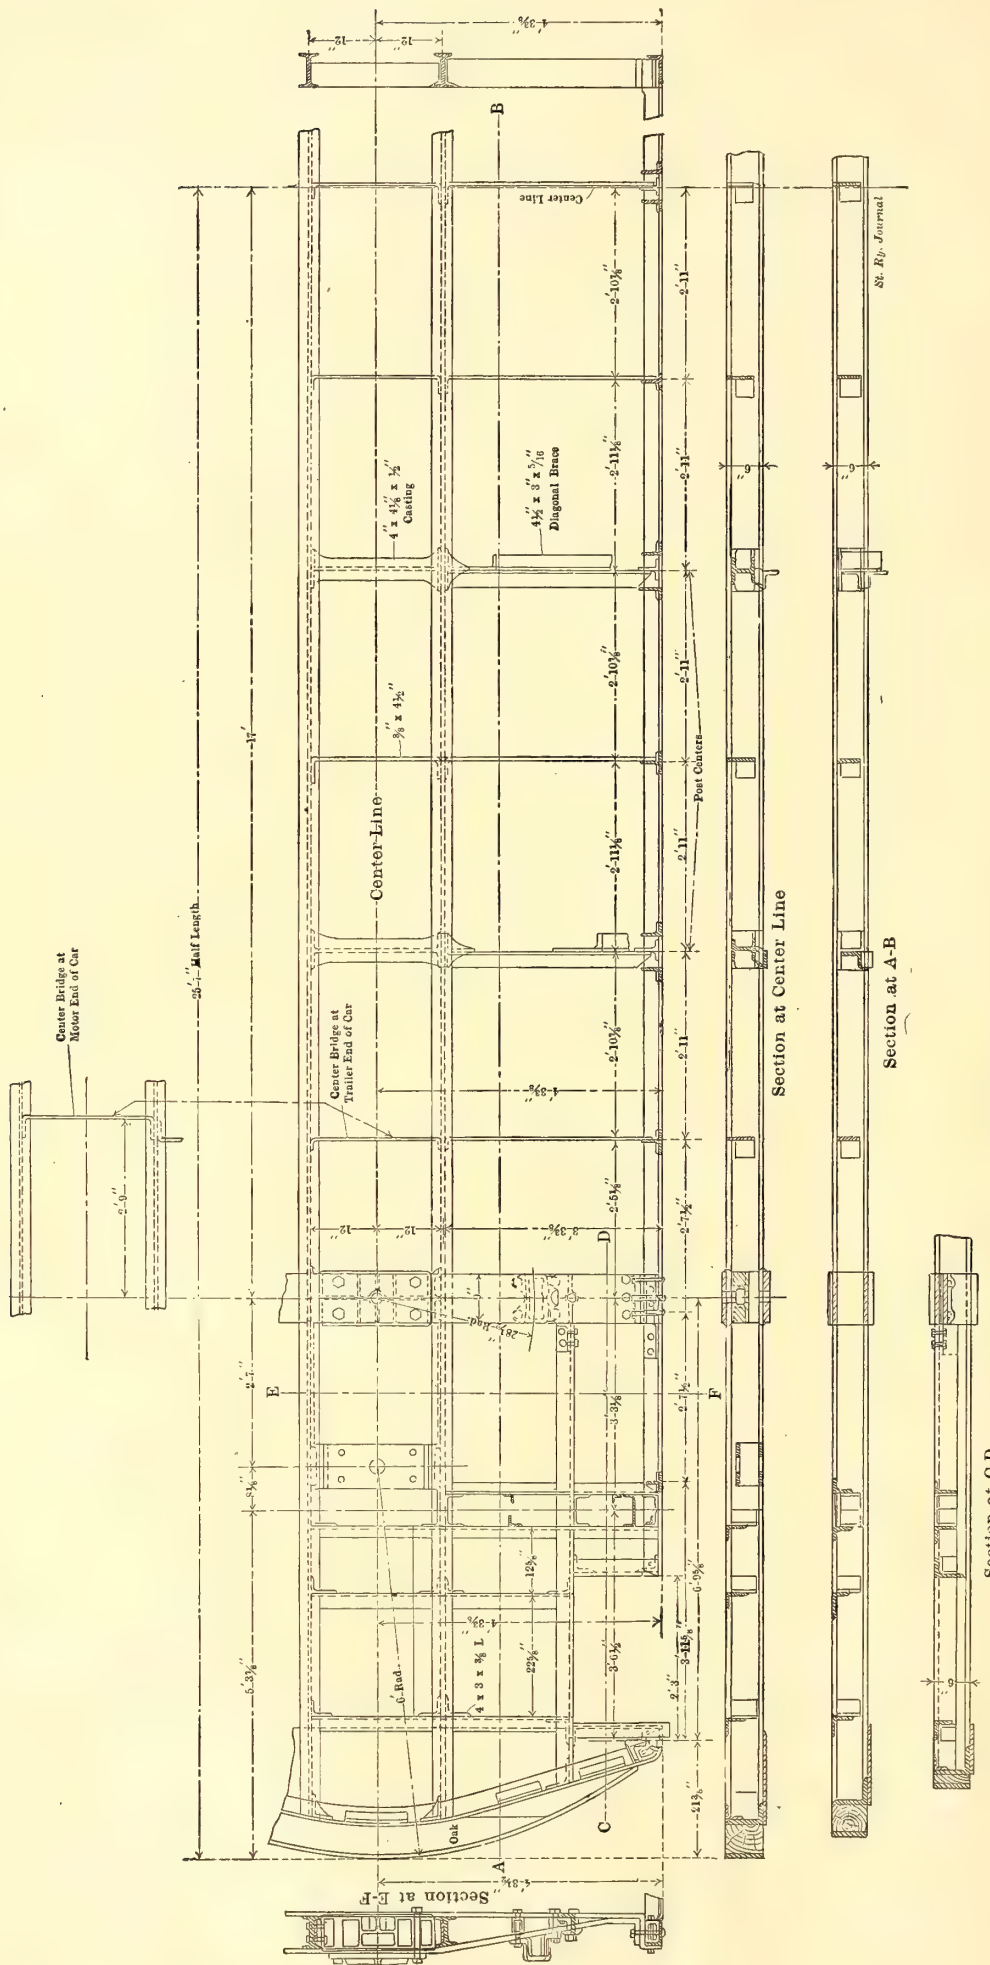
FLOOR FRAMING OF STEEL MOTOR CAR
